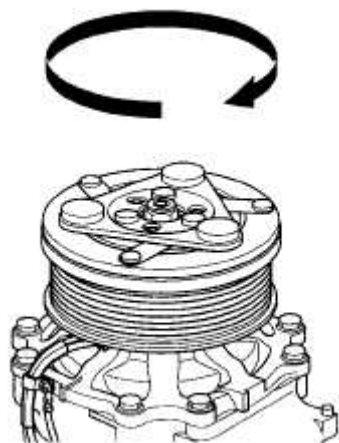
Checking Rotor Pulley Bearing Play And Drag Rotating Rotor Pulley
